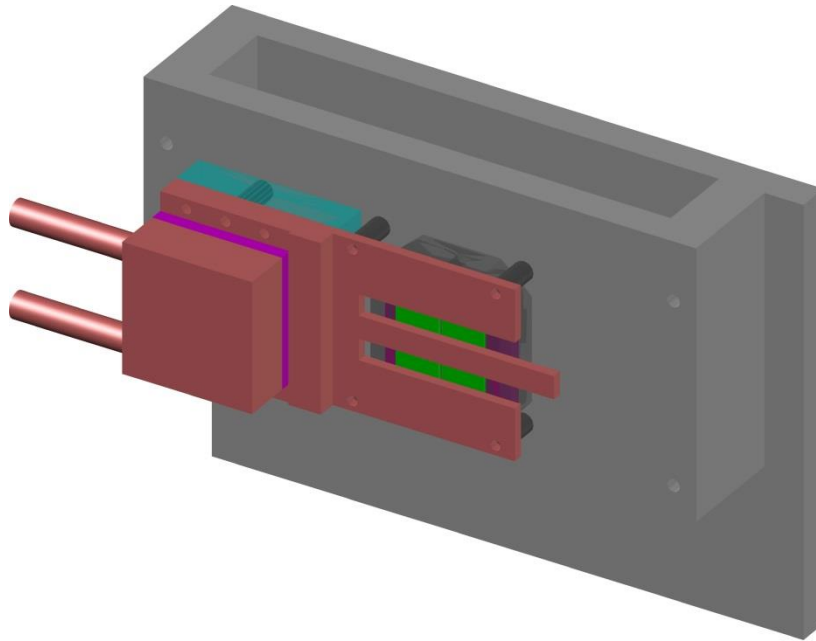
The detector and the cooling system mounted on the end vacuum chamber (Collimator housing).
